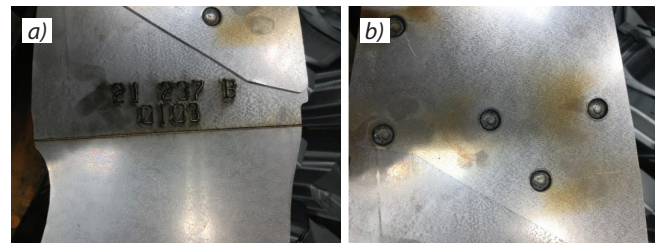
Welds on the blanks: a) butt, b) hole welds
